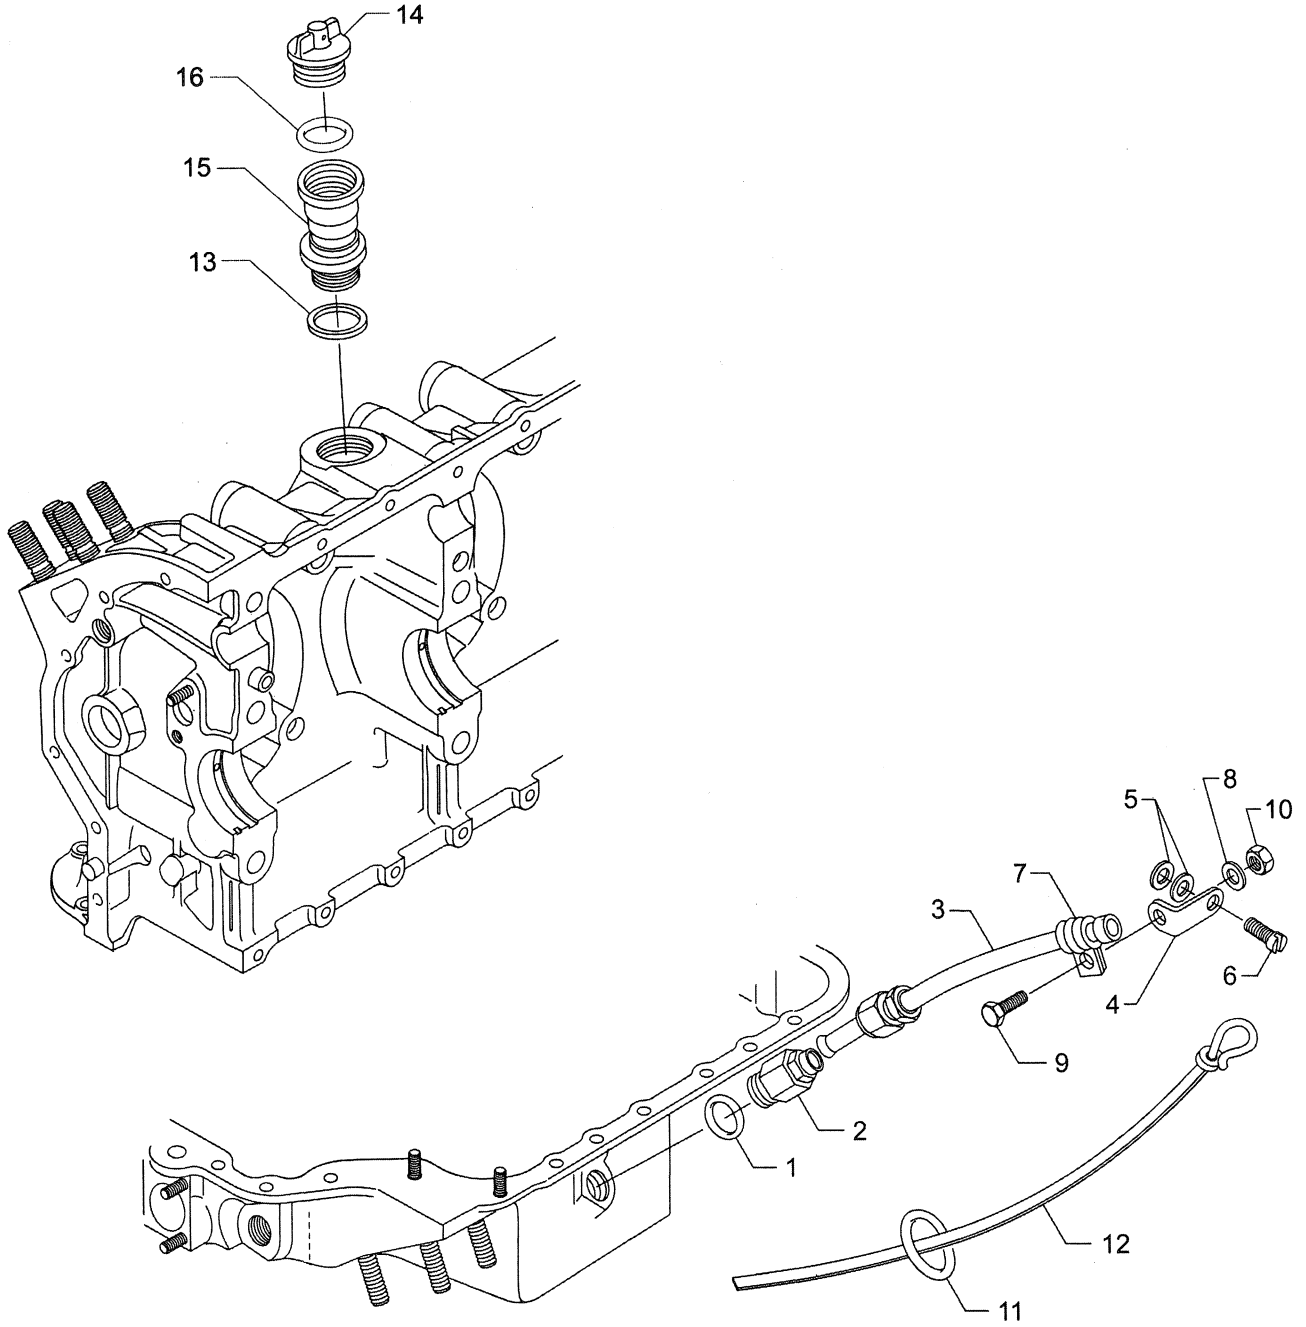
OIL LEVEL GAGE ASSEMBLY
